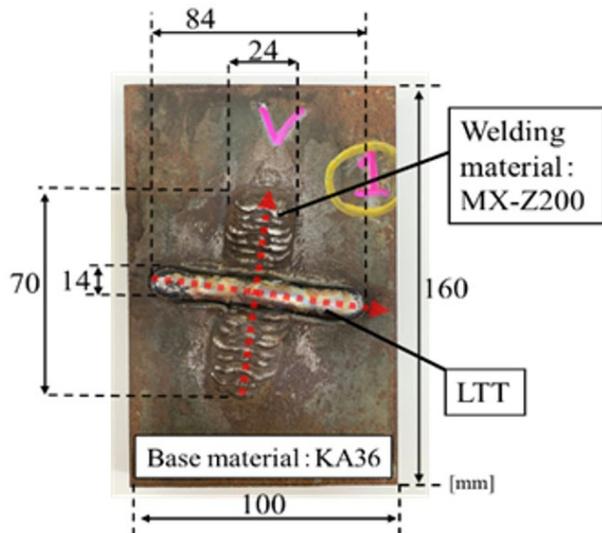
Repair welding bead of LTT welding material and its test piece for residual stress measurement
